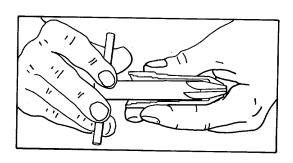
Cleaning Injector Nut Spray Tip with Tool J 9418-5
